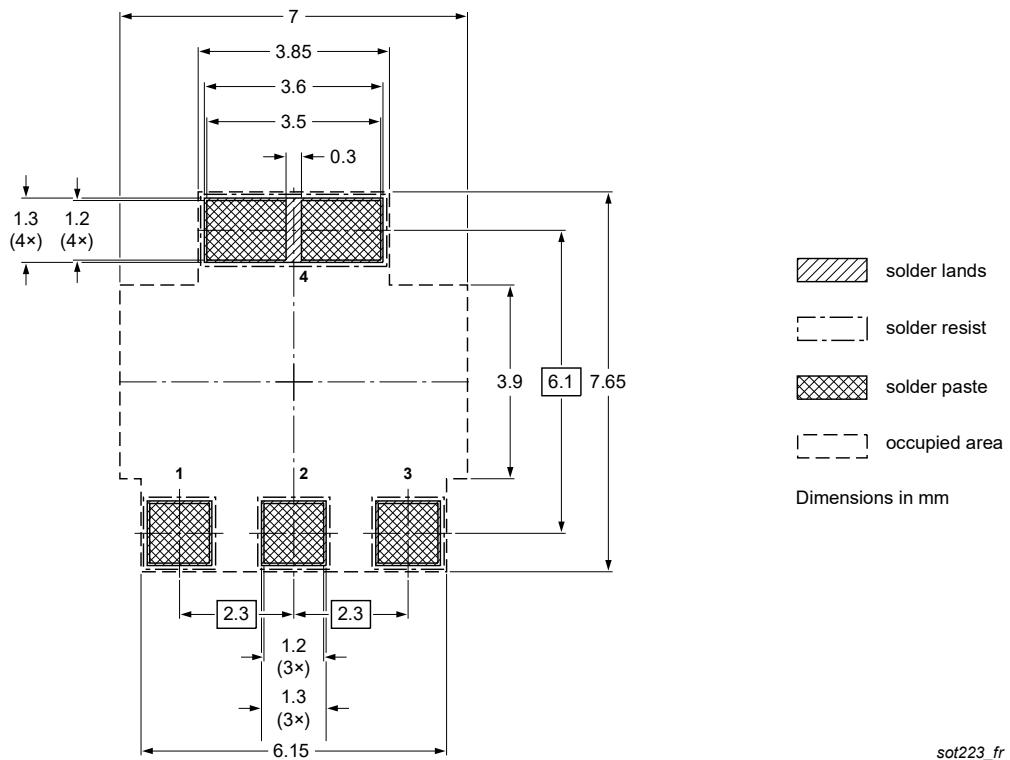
Reflow soldering footprint for SC-73 (SOT223)
